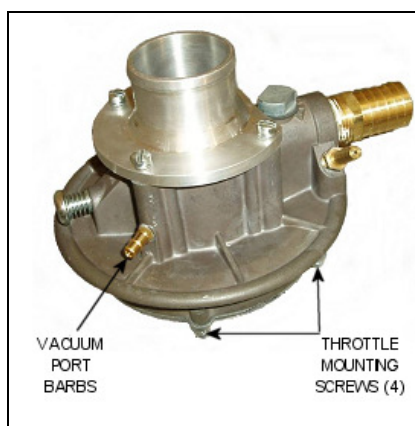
Throttle Adapter Mount Screws and Vacuum Port Barb
